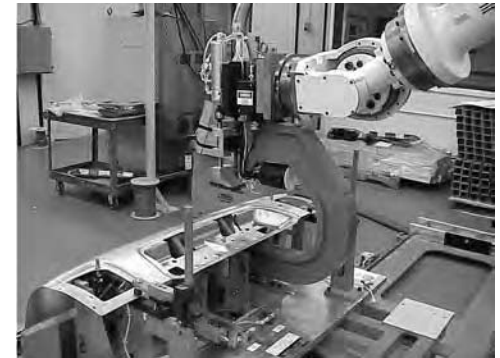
C-frame ultrasonic welder on a robot arm welding a license plate holder to an aluminum automotive trunk lid
